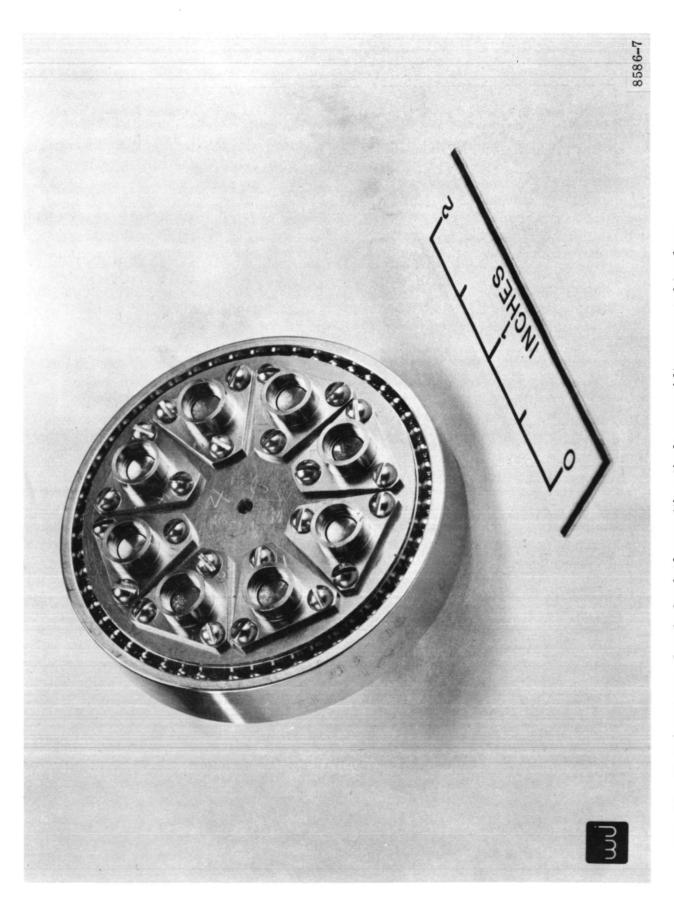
Main bearing and cathode platform with cathode assemblies mounted in place.
